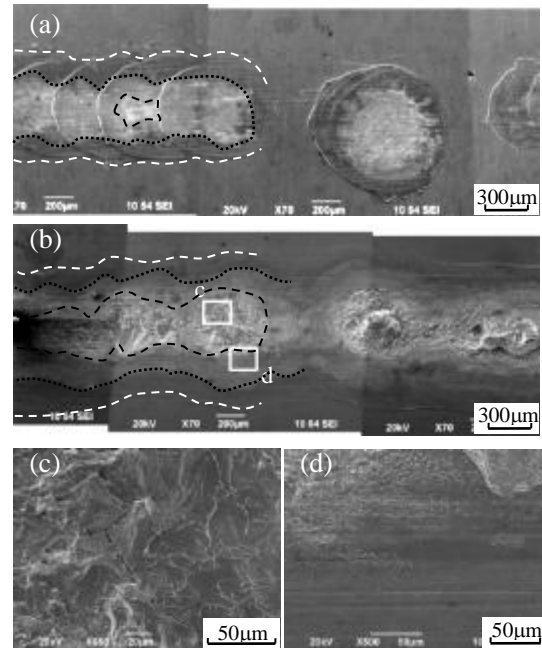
Fracture surfaces of BMG side of the dissimilar joints made with different welding current. (a) 468 A, (b) 827 A, (c)(d) highlighted areas in (b).
